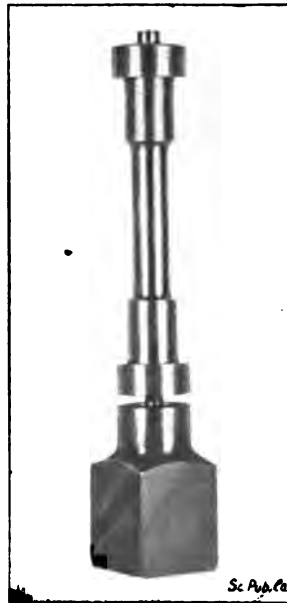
TENSION SPECIMEN FROM STEEL CRANK AXLE.
